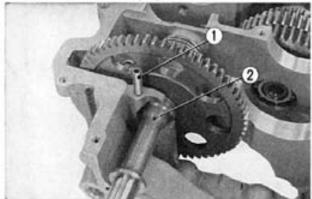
① Kick spindle stopper pin ② Kick starter spindle
